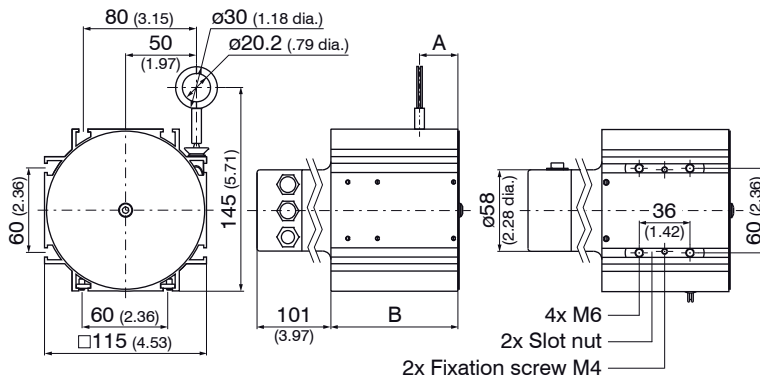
Dimensional drawing WDS- ... - P115 - CO/PB, dimensions in mm (inches), not to scale
